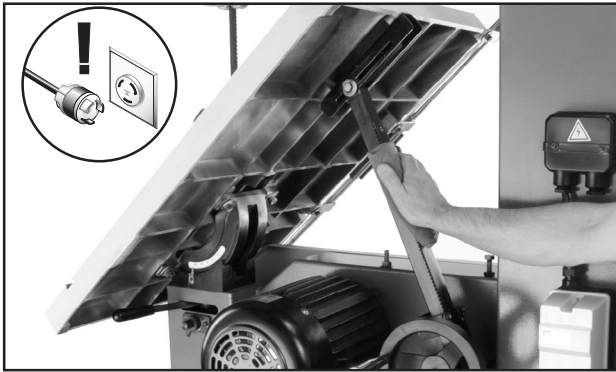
Example of lubricating table tilt rack and pinion assembly.
